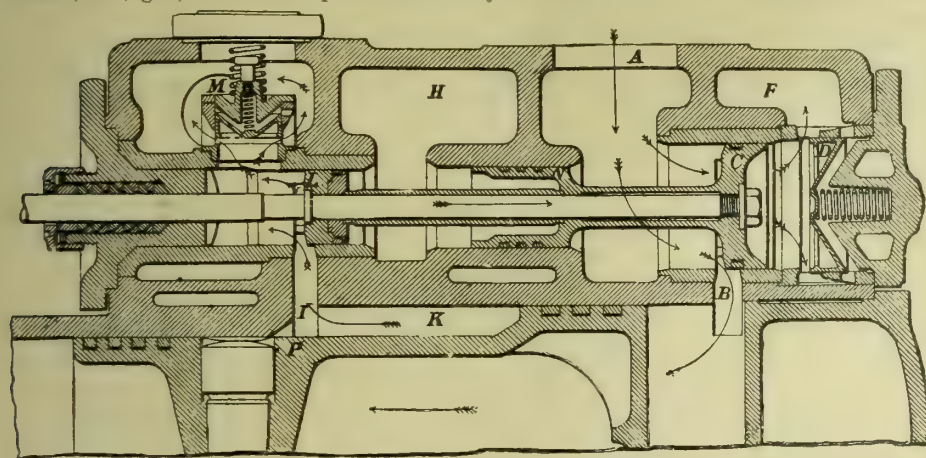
"KOSTER" 2-STAGE AIR COMPRESSOR, SHOWING OPERATION OF PISTON AND VALVE GEAR. MESSRS. W. H. BAILEY & CO., LTD., SALFORD.
